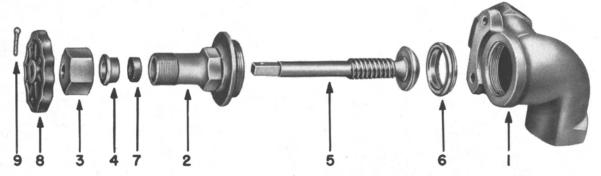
Exploded View of No. 98 End Train Pipe Valve
